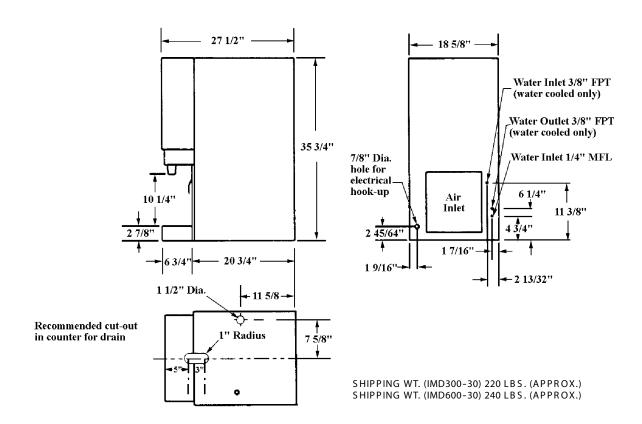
DIMENSION DRAWINGS (30 LBS.) IMD 300-30 AND IMD 600-30
